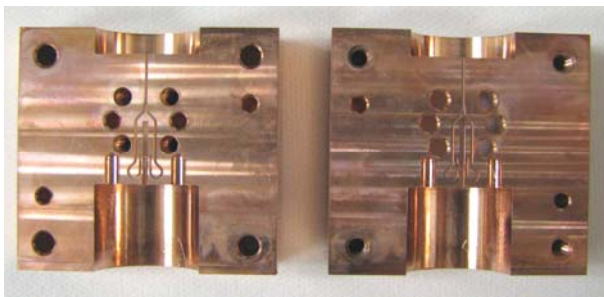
Photograph of the two unassembled blocks of the OMT showing the internal waveguide circuitry.
